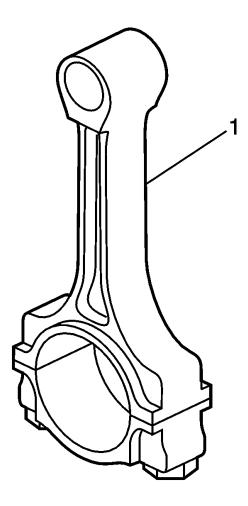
Connecting Rod Courtesy of GENERAL MOTORS COMPANY
